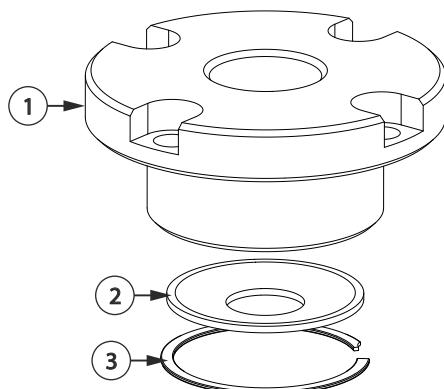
Install the Heat Sink and Cap Into Manifold Pocket
